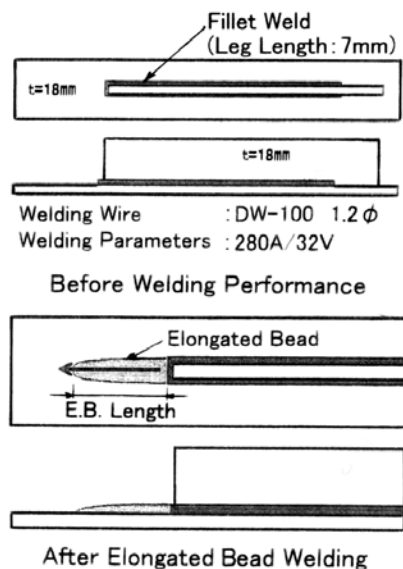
Test specimen for welding procedure test of elongated bead length
